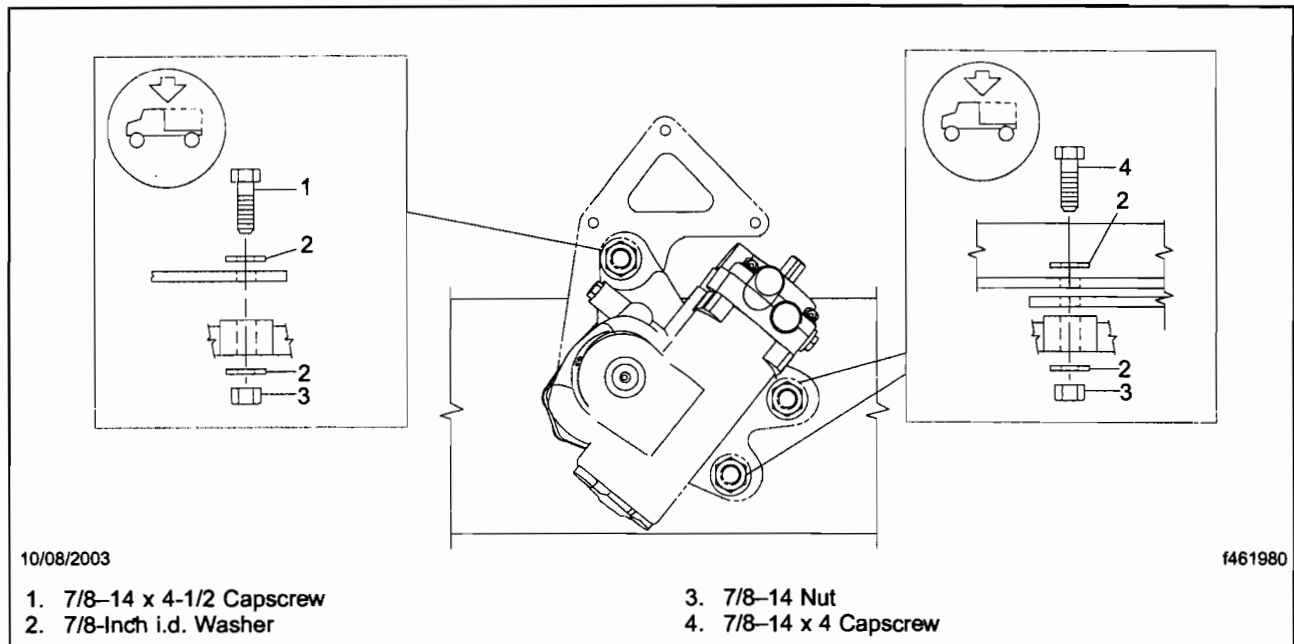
, Steering Gear Installation, Business Class M2 configuration shown
